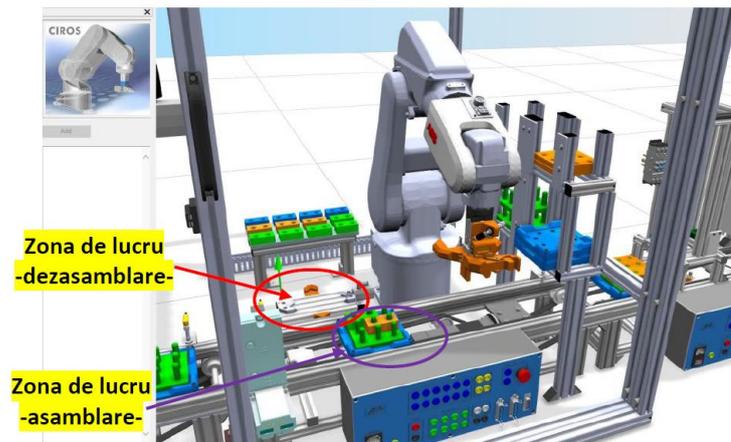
Station 3 - assembly C type pieces –CIROS Simulator
